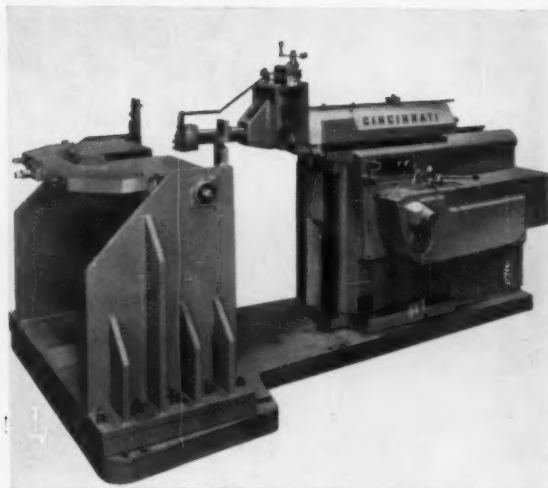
Cincinnati shaper built to machine two surfaces at right angles to each other
